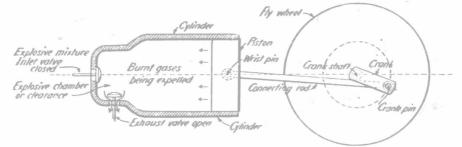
CLEARANCE STROKE, THE PISTON RETURNING TO DRIVE OUT THE BURNT GASES. VALVES OPEN
